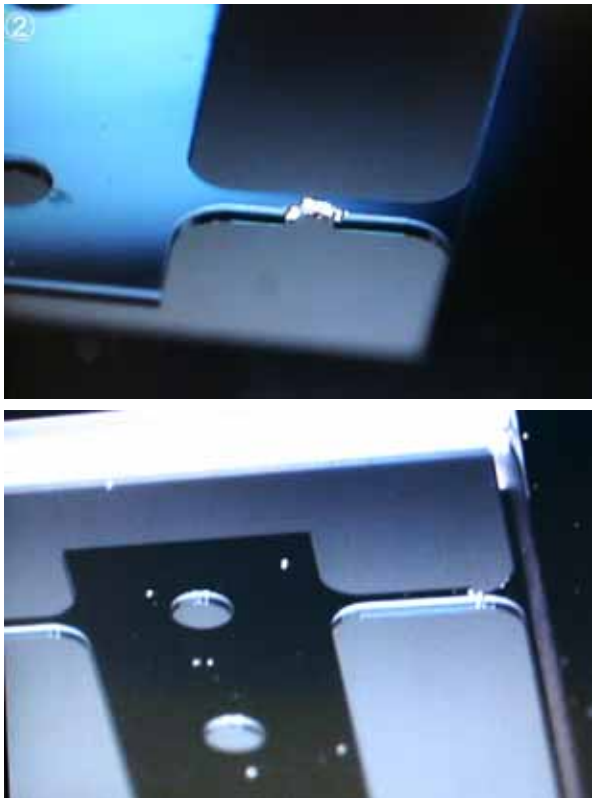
Photographs of two typical fracture points (Upper: center of beam, Lower: fillet region of beam)
